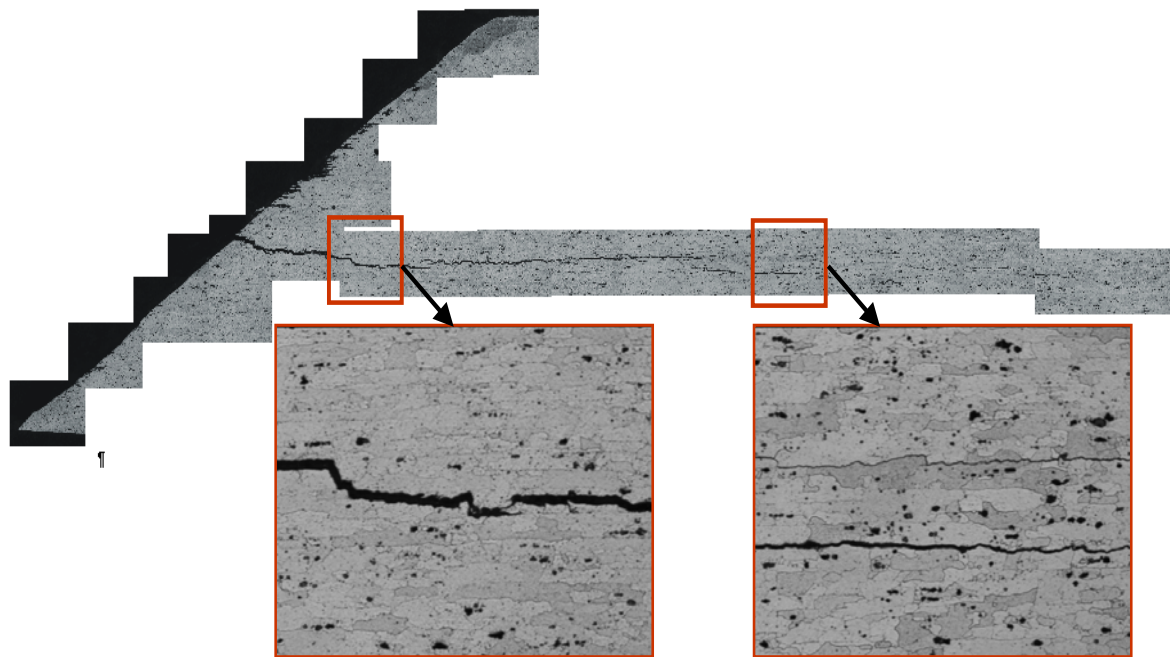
SCC Failures During Service at Mid Thickness of a Sheet Made of Alloy 7079-T6. Section of rivet hole, displaying a 4 mm (0.157") long crack. Crack at fastener hole on a fuselage panel near the troop door of C141 Starlifter [14].
